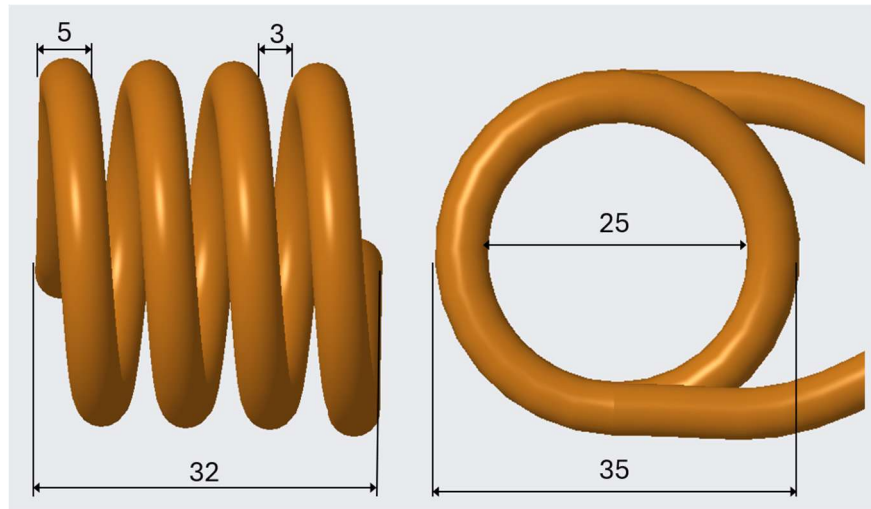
Drawing of the copper tube solenoid used on the torsion machine at the DIN - Department of Industrial Engineering, University of Bologna.
